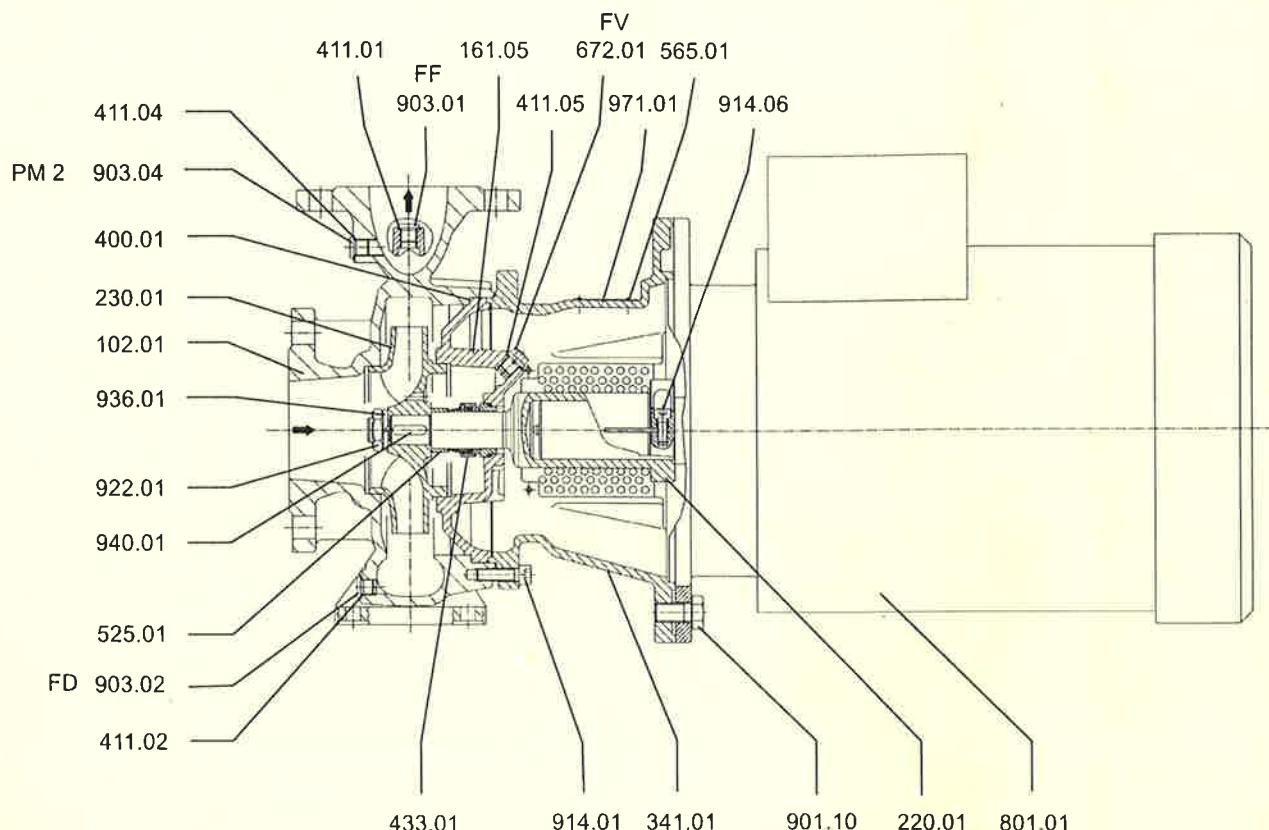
U3...D – Unbalanced mechanical seal – sizes with diameter 24 and 30 at the shaft seal
